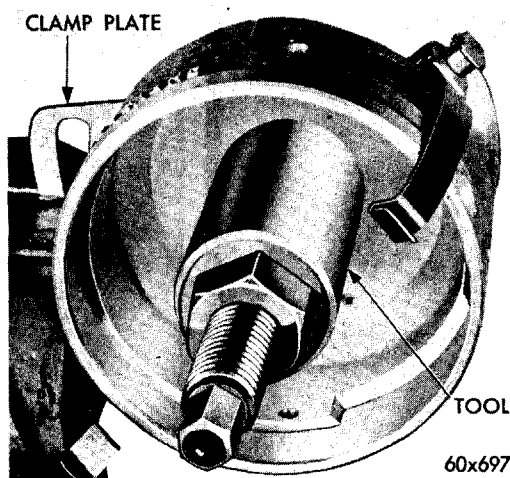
Removing Distributor Housing Upper Bushing (6 Cylinder)
